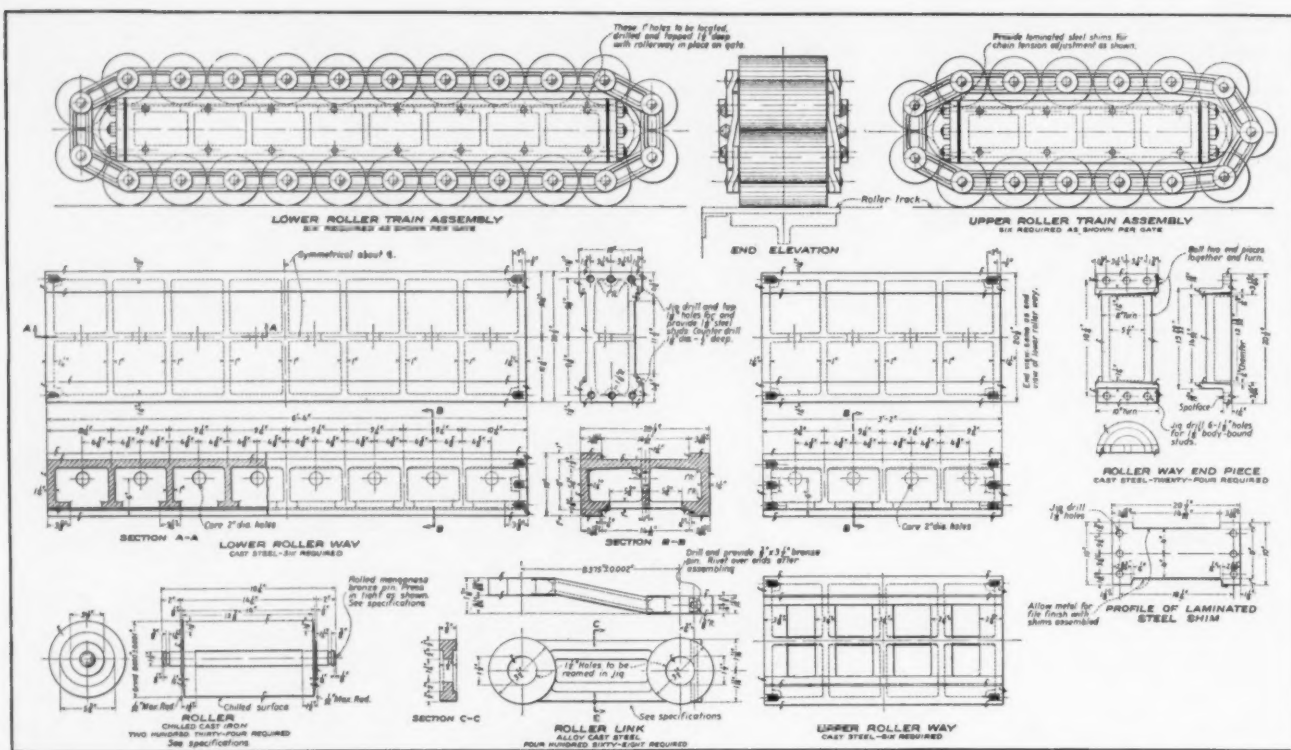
ROLLER-TRAIN ASSEMBLIES AND PARTS
